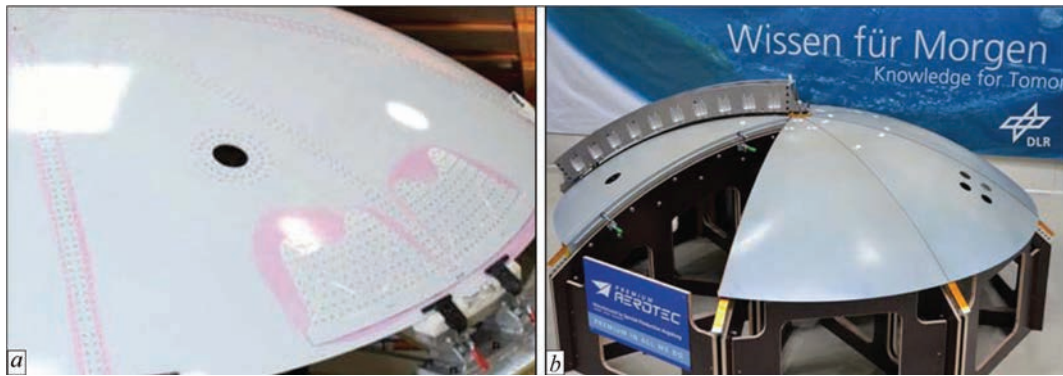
Demonstration model of bulkhead of Airbus A320: *a* — acting version made of aluminum with a large number of rivets; *b* — welded demonstration model without rivets with «welding bridge»
